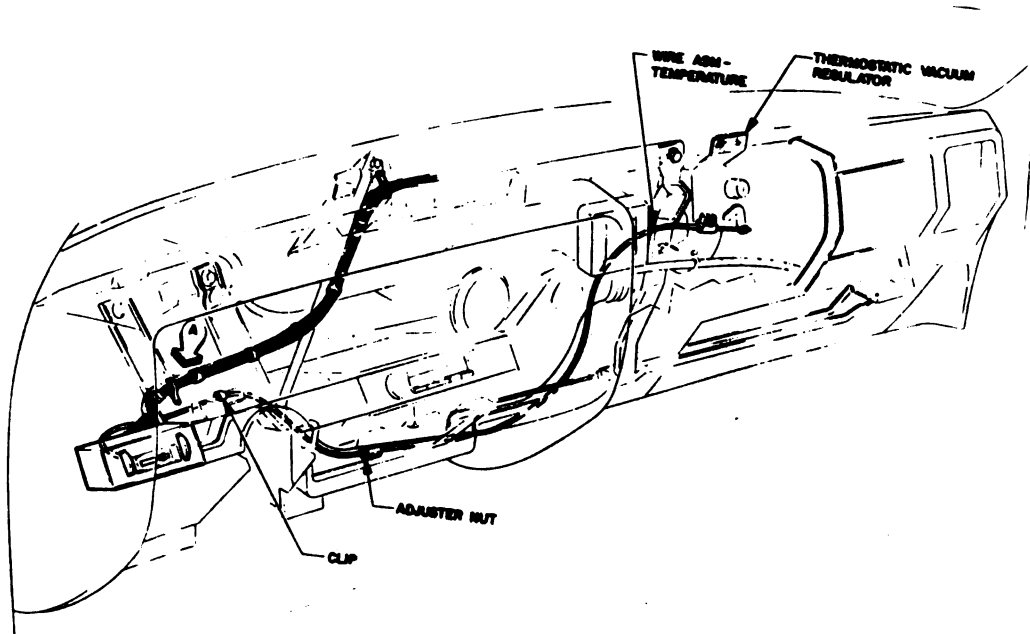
INSTRUMENT PANEL CONNECTIONS
